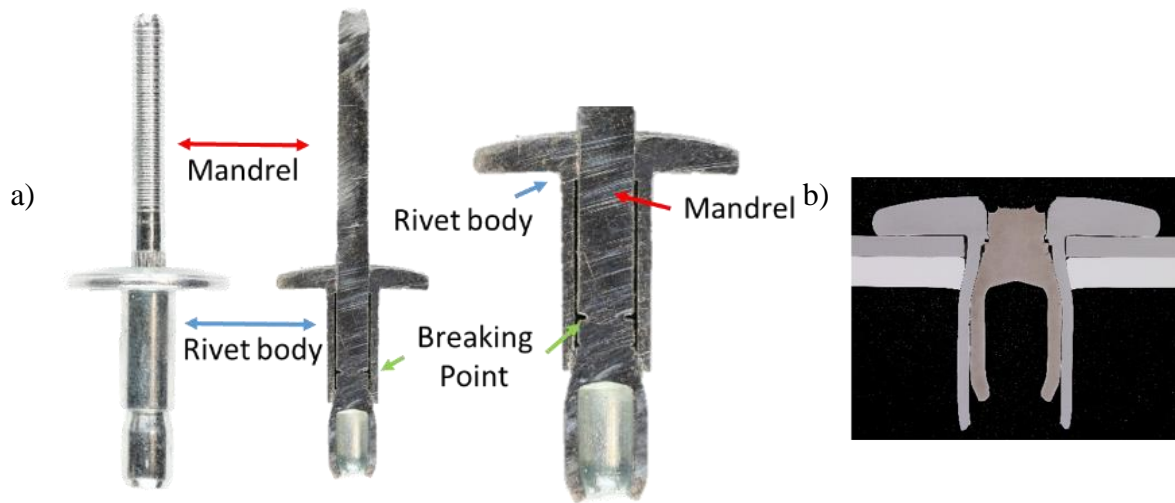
Photographs of (a) blind rivet components and (b) dissimilar sheets joined with blind rivet process.
